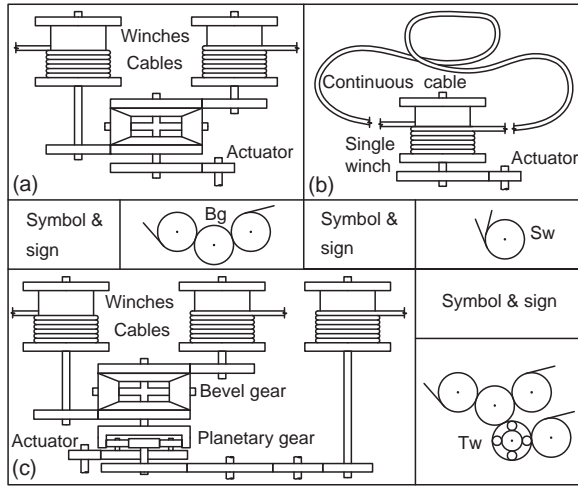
Schematics of (a) the double winch bevel gear system; (b) the single winch double-cable system; and (c) the triple winch planetary & bevel gear system.
